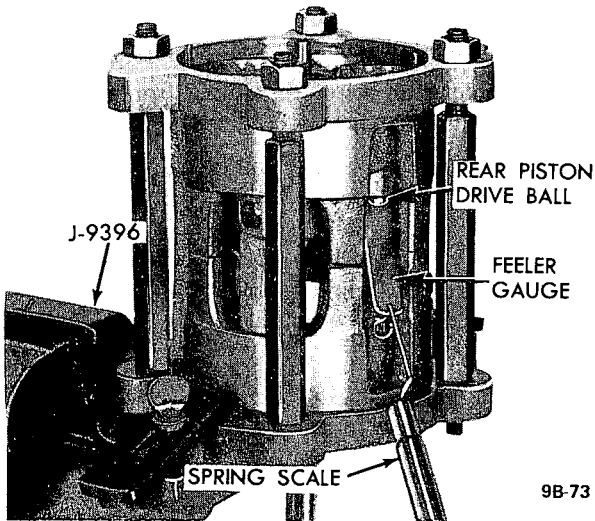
B-100 Checking Drag on Selected Feeler Gage Leaf with Spring Scale - 6 Cylinder Compressor
